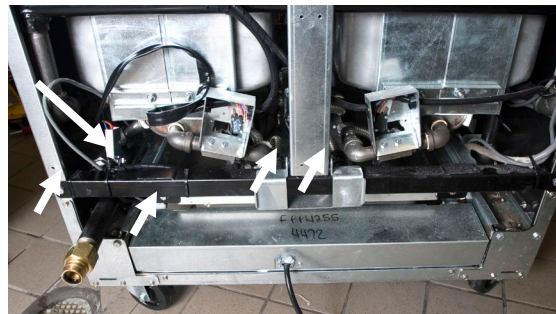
The square oil-return manifold is visible. The port on the left side (marked by down arrow) is removed and the bolts (marked by arrows) supporting the manifold are removed or loosened. The right-side manifold bolts are loosened.
